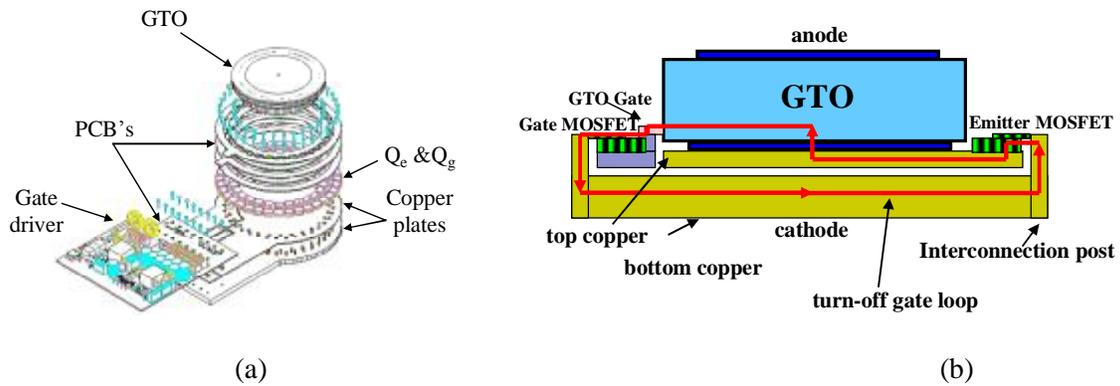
The mechanical design of the old generation ETO: (a) assembling drawing and (b) the cross section
